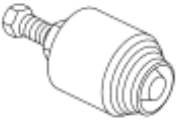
Identifying Special Tools (014-00071) & (303-D089)
